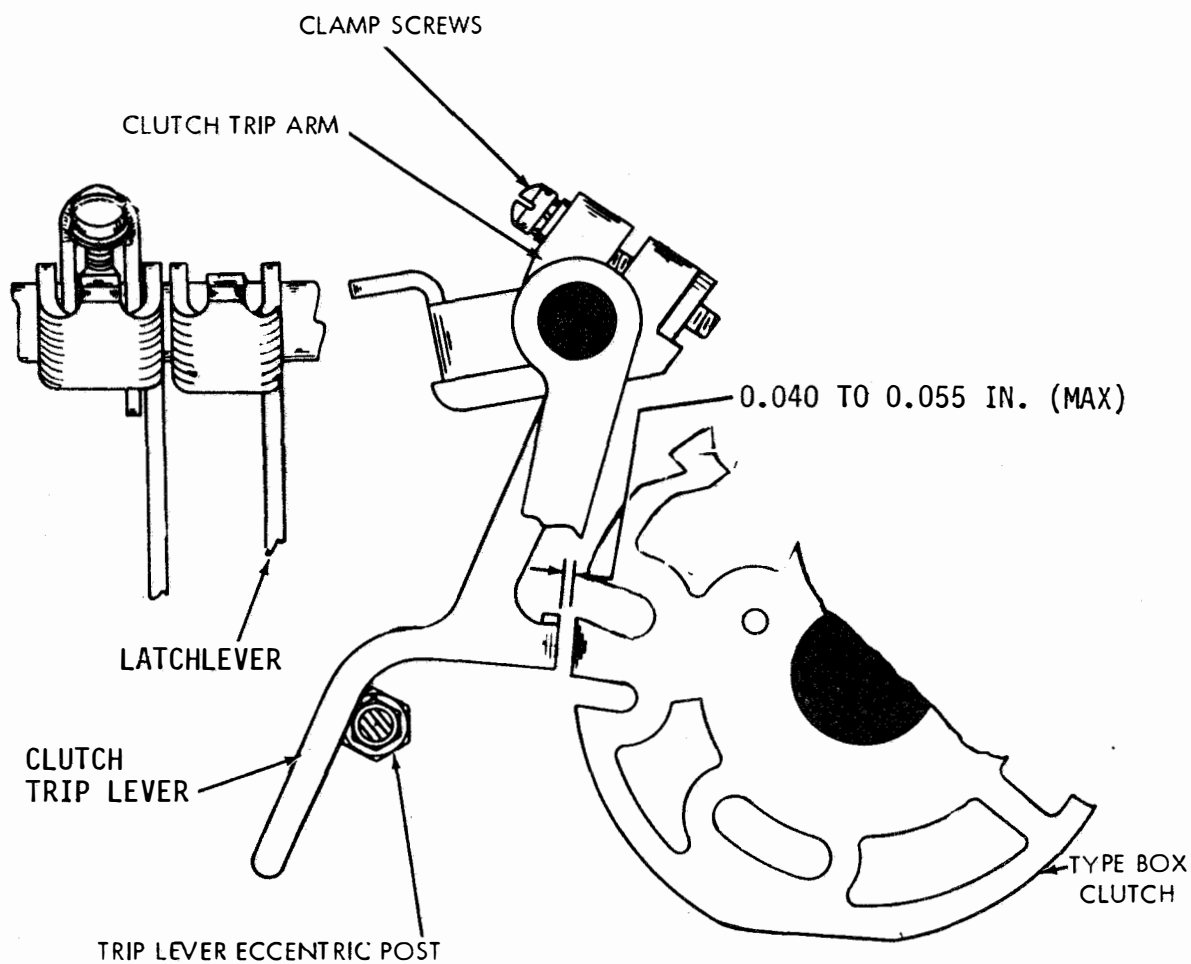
Type Box Clutch Trip Lever (Selective Calling Units, With or Without Off-Line Shift Solenoid), Left Side View
